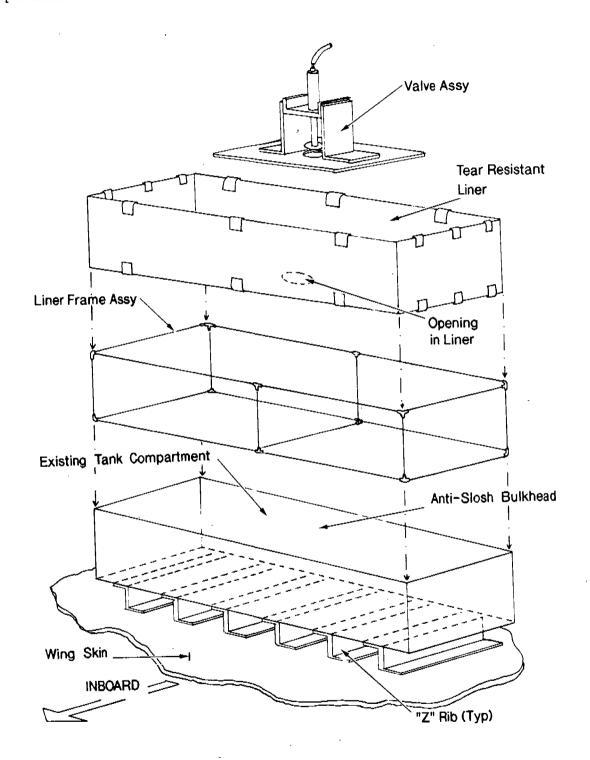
EXPLODED VIEW OF CONTAINMENT DESIGN
